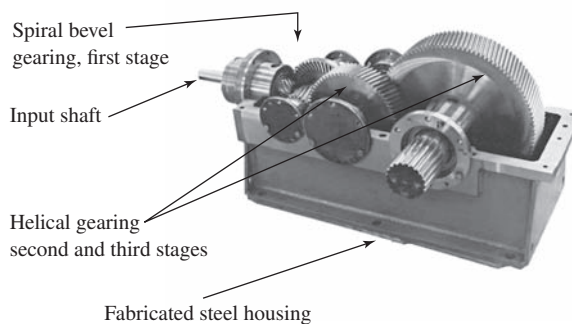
Three-stage industrial gear reducer employing spiral bevel and helical gears (Sumitomo Machinery Corporation of America, Teterboro, NJ)
